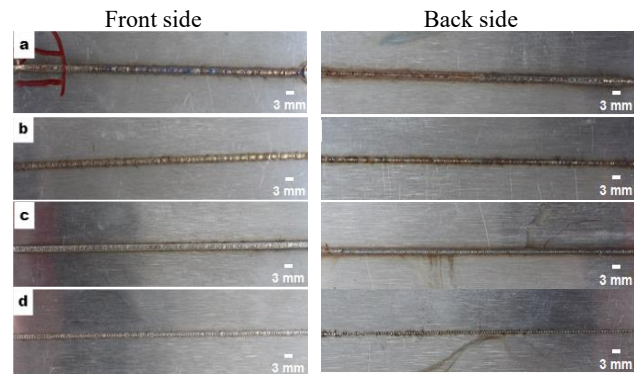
Macromorphology of the weld: a–welding speed 6 mm/s, welding power 1.5 kW; b–welding speed 6 mm/s, welding power 1.6 kW; c–welding speed 6 mm/s, welding power 1.7 kW
